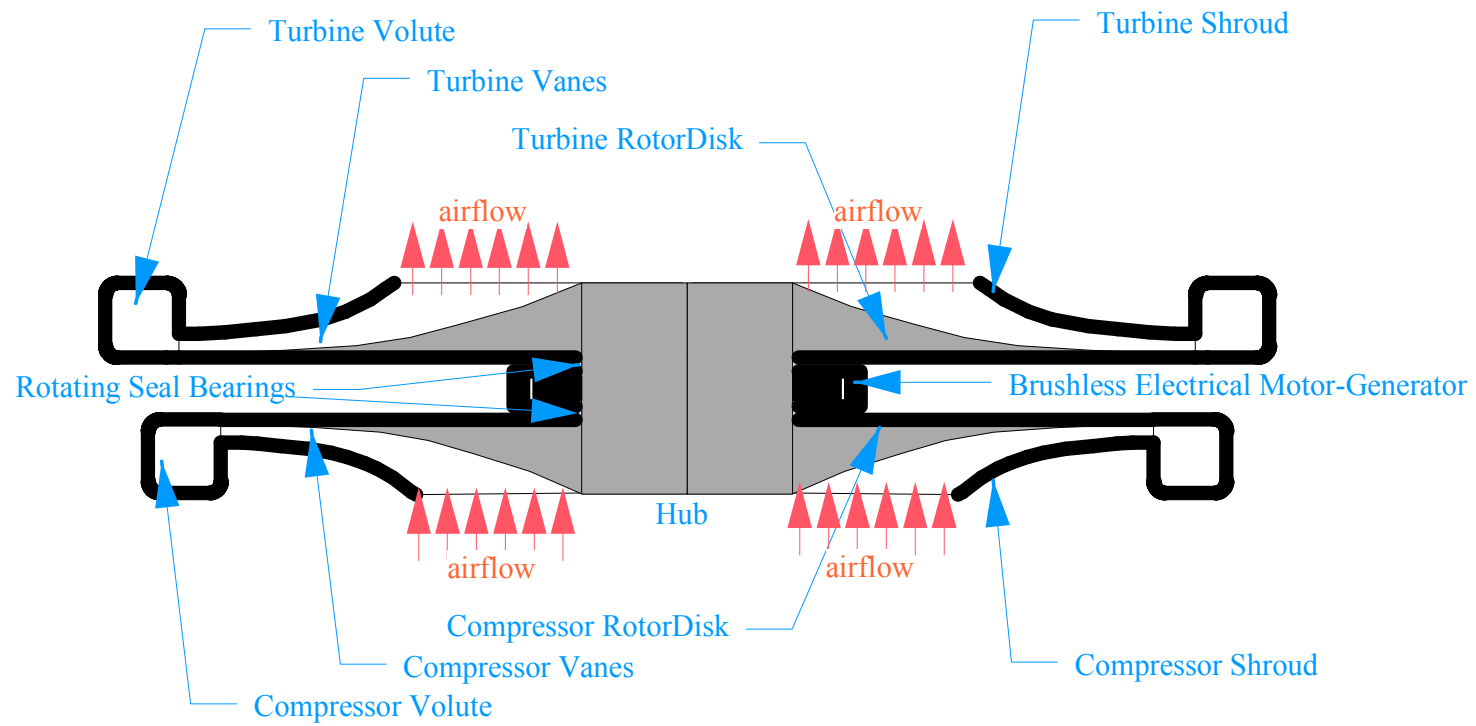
Low Pressure Turbine, Motor/Generator, and Compressor, Mounted On Common CoRotating Shaft
